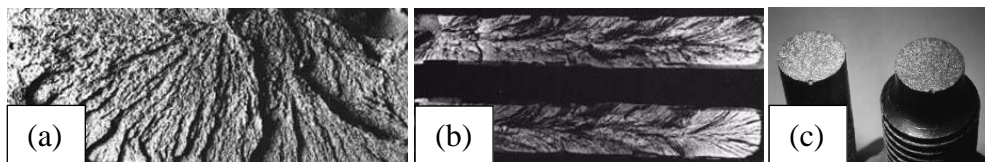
Image shows (a) Chevron fracture surface, (b) radiating ridge fracture surface and (c) flat fracture surface shows brittle failure [40].
